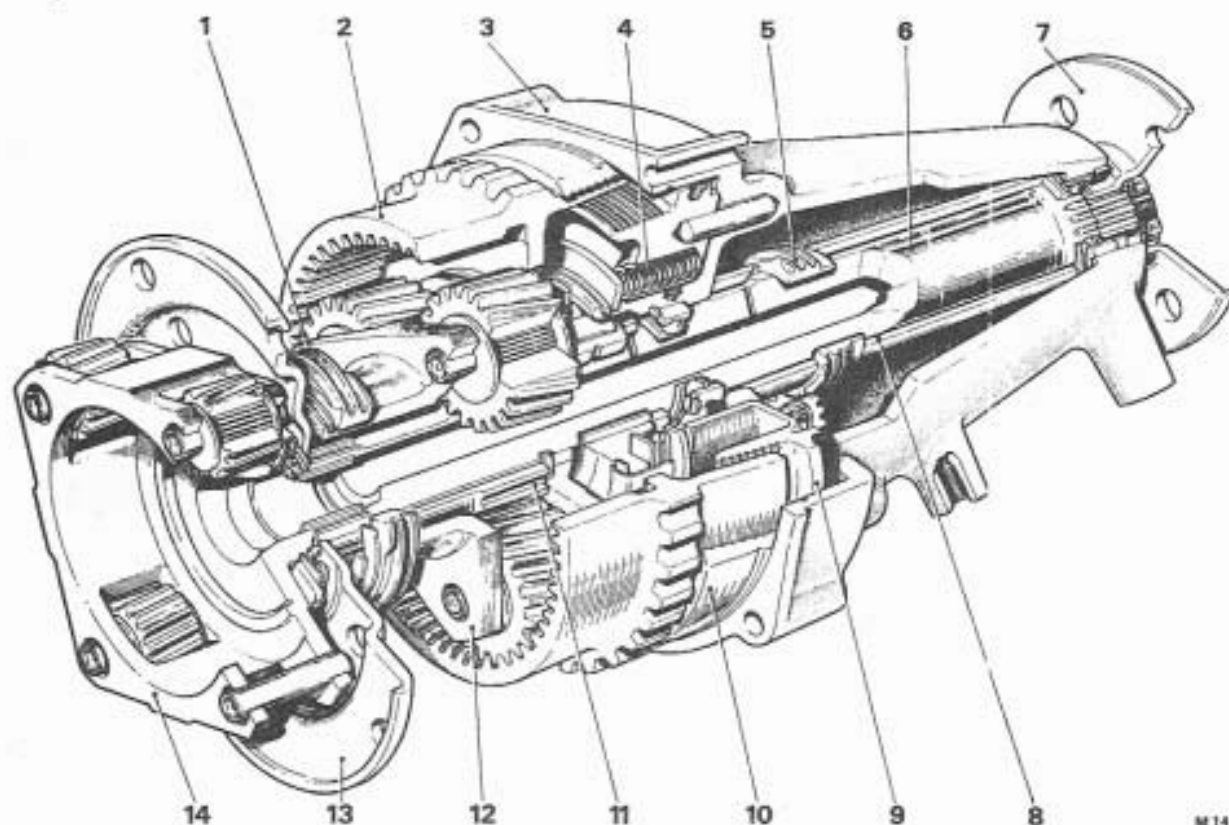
REVERSE ASSEMBLY—CUTAWAY VIEW
